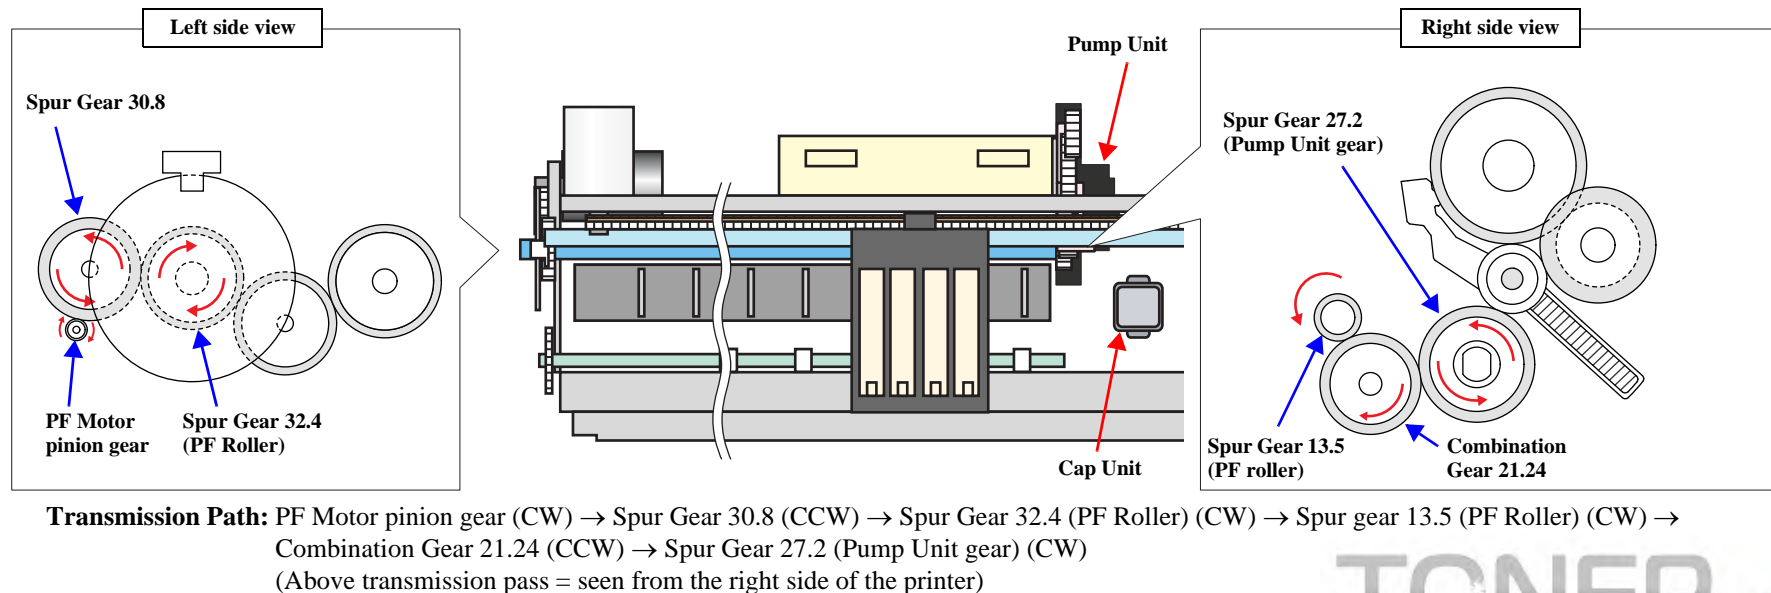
PF Motor drive transmission path to the Pump Unit
